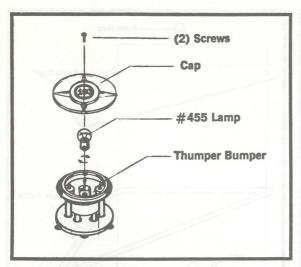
Thumper bumper lamp replacement. Use a 455-type bulb.
